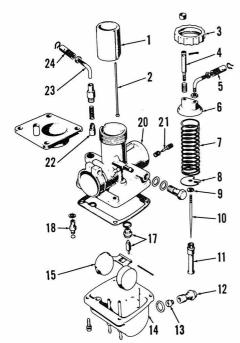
Exploded view of typical carburetor used on F6 and F7 models. Pilot jet is pressed into lower surface of body (20). Refer to Fig. K4-1 for legend.
